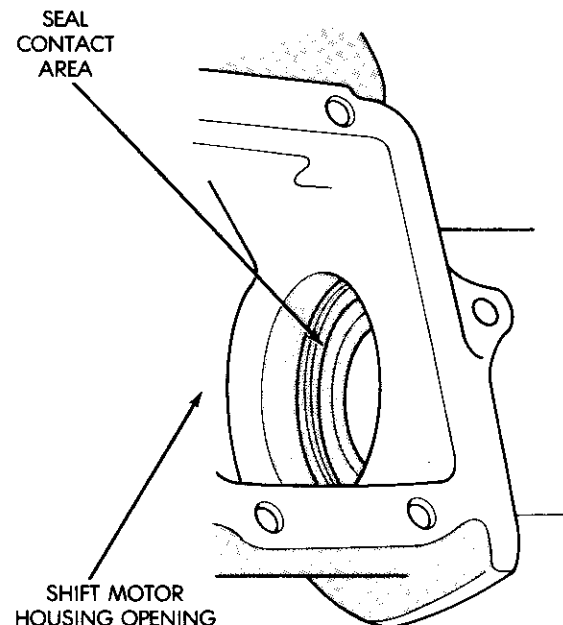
Axle Shaft Tube Bore Seal Contact Area
